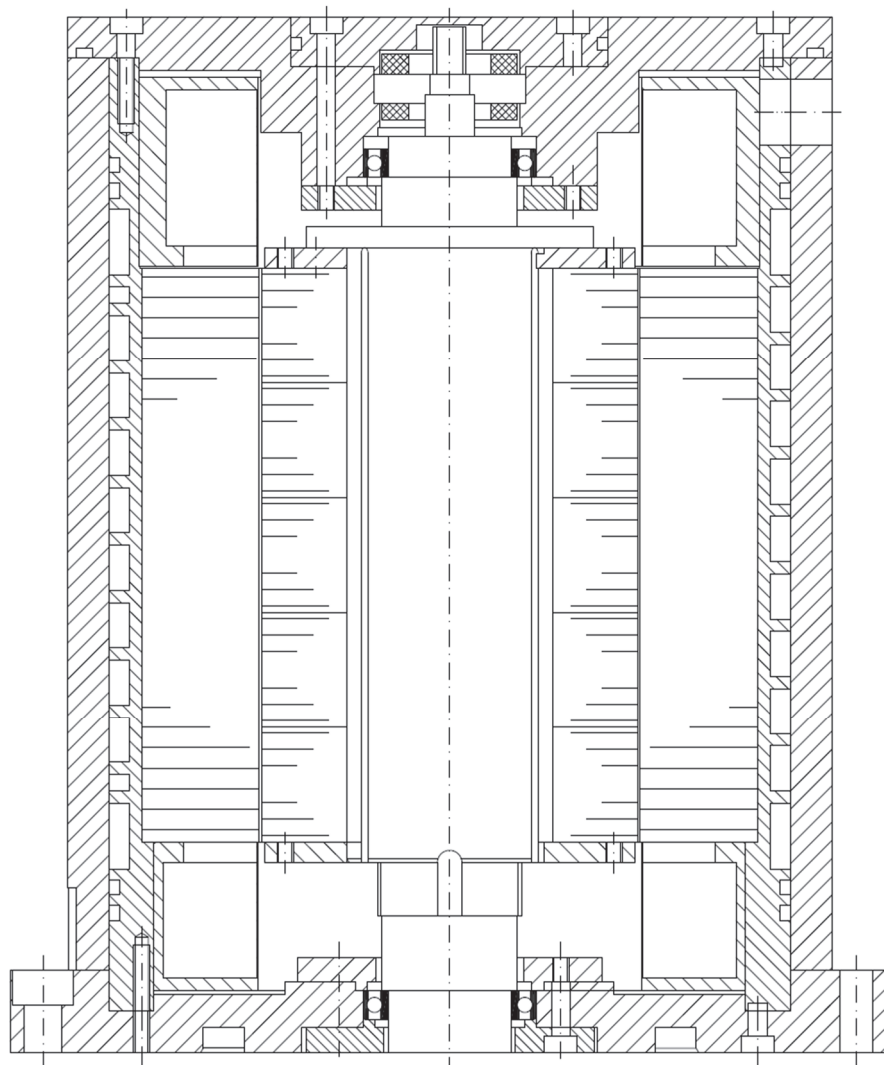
Assembly drawing of the electric machine for the DE-REX powertrain
